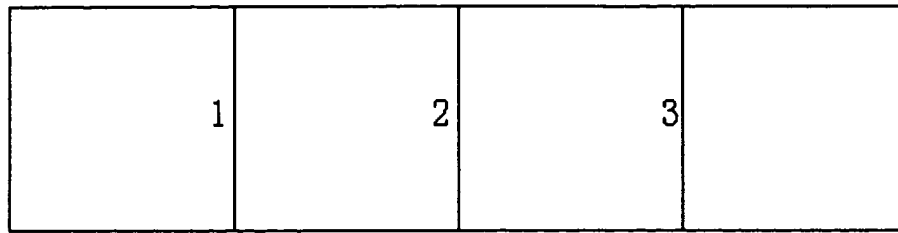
A/B: The modified front/back frame panel structure model with only three vertical columns (40 foot and 40 foot high cube collapsible container)
